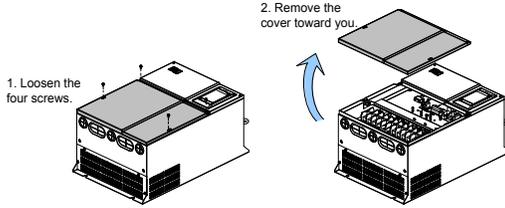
Removal of the front cover of the IS300 (sheet metal housing)
